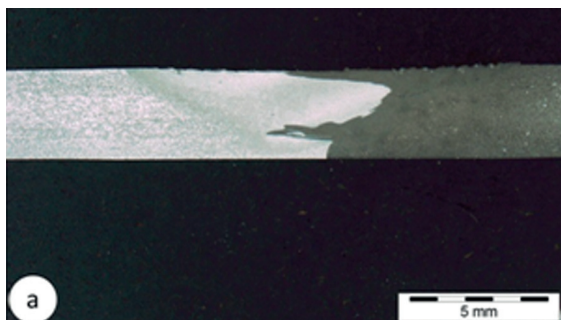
FSW weld macrostructure presented according to the heat input.
